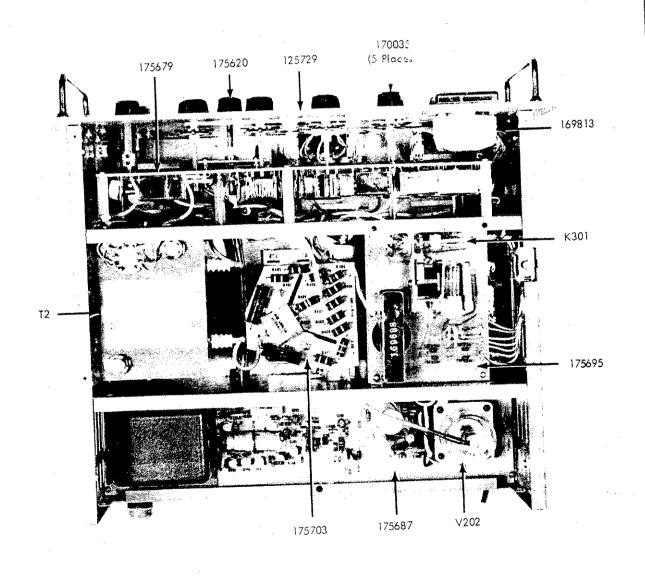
FINAL ASSEMBLY (Sheet 1 of 2)
